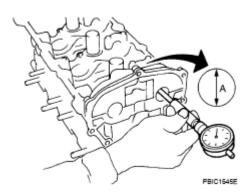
Checking Inner Diameter A Of Camshaft Bracket With Bore Gauge
